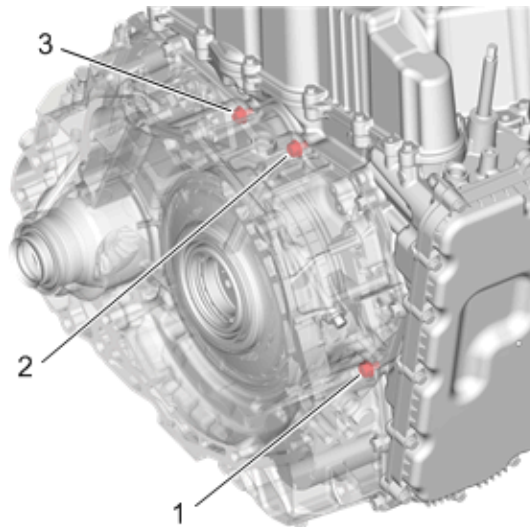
Hidden Torque Dampener And Differential Housing Bolts
